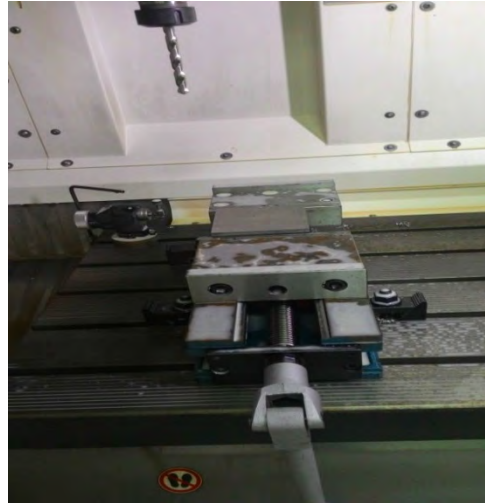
Position of workpiece after clamp in the CNC milling machine
